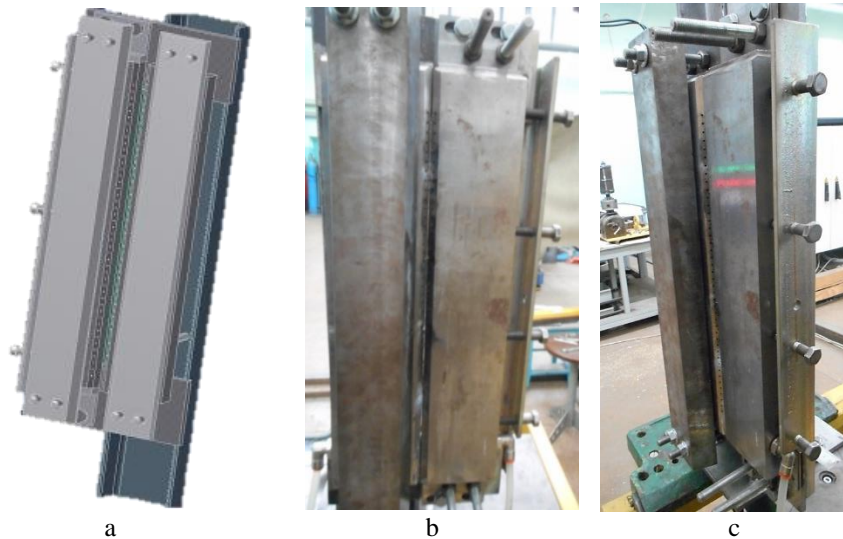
Clamp for welding T-joints: (a) 3-D model, (b) front view, (c) side view
